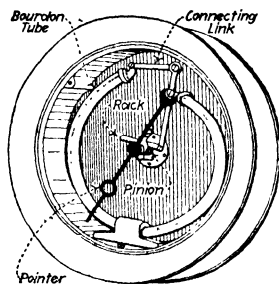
Interior of steam gage with double Bourdon tube. (Ashton Valve Co.)
